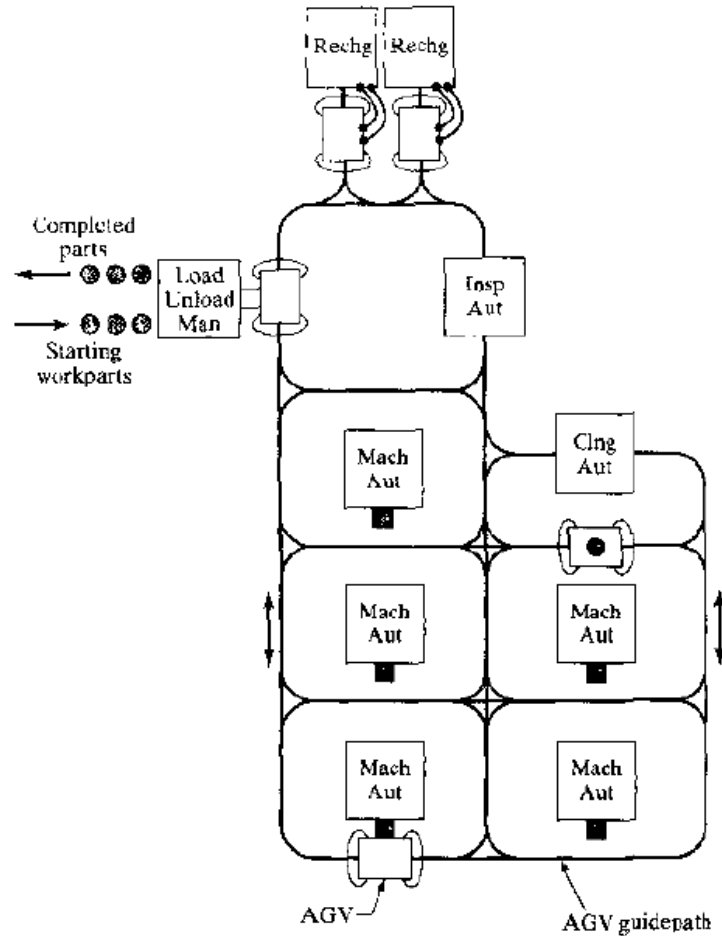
Open field FMS layout. Key: Load = parts loading, UnLd = parts unloading, Mach = machining, Cng = cleaning, Insp = inspection, Man = manual, Aut = automated, AGV = automated guided vehicle. Rechg = battery recharging station for AGVs.
